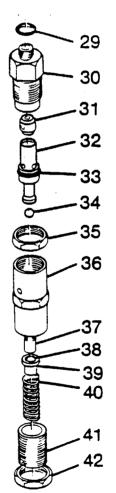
Hydraulic Power Pack Assembly (Sheet 2 of 2)
